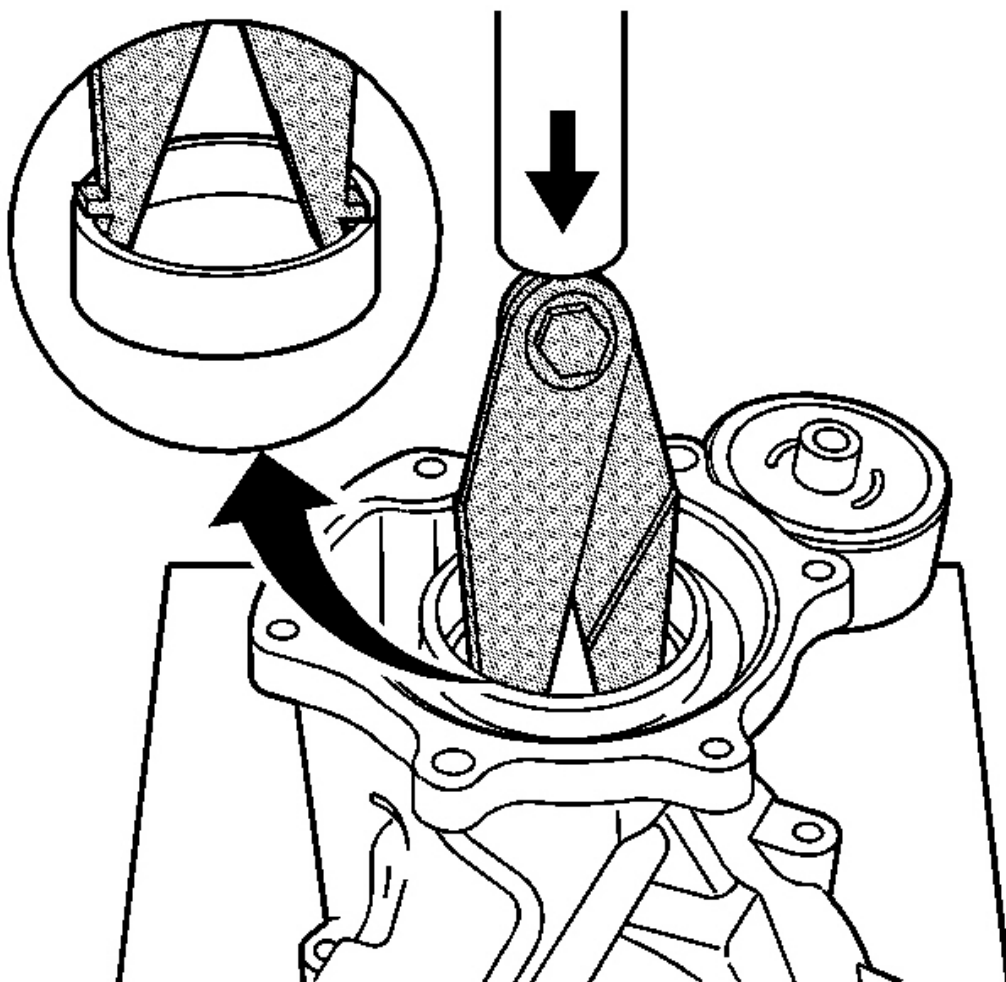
Placing J3940 Behind The Rear Pinion Bearing Race
